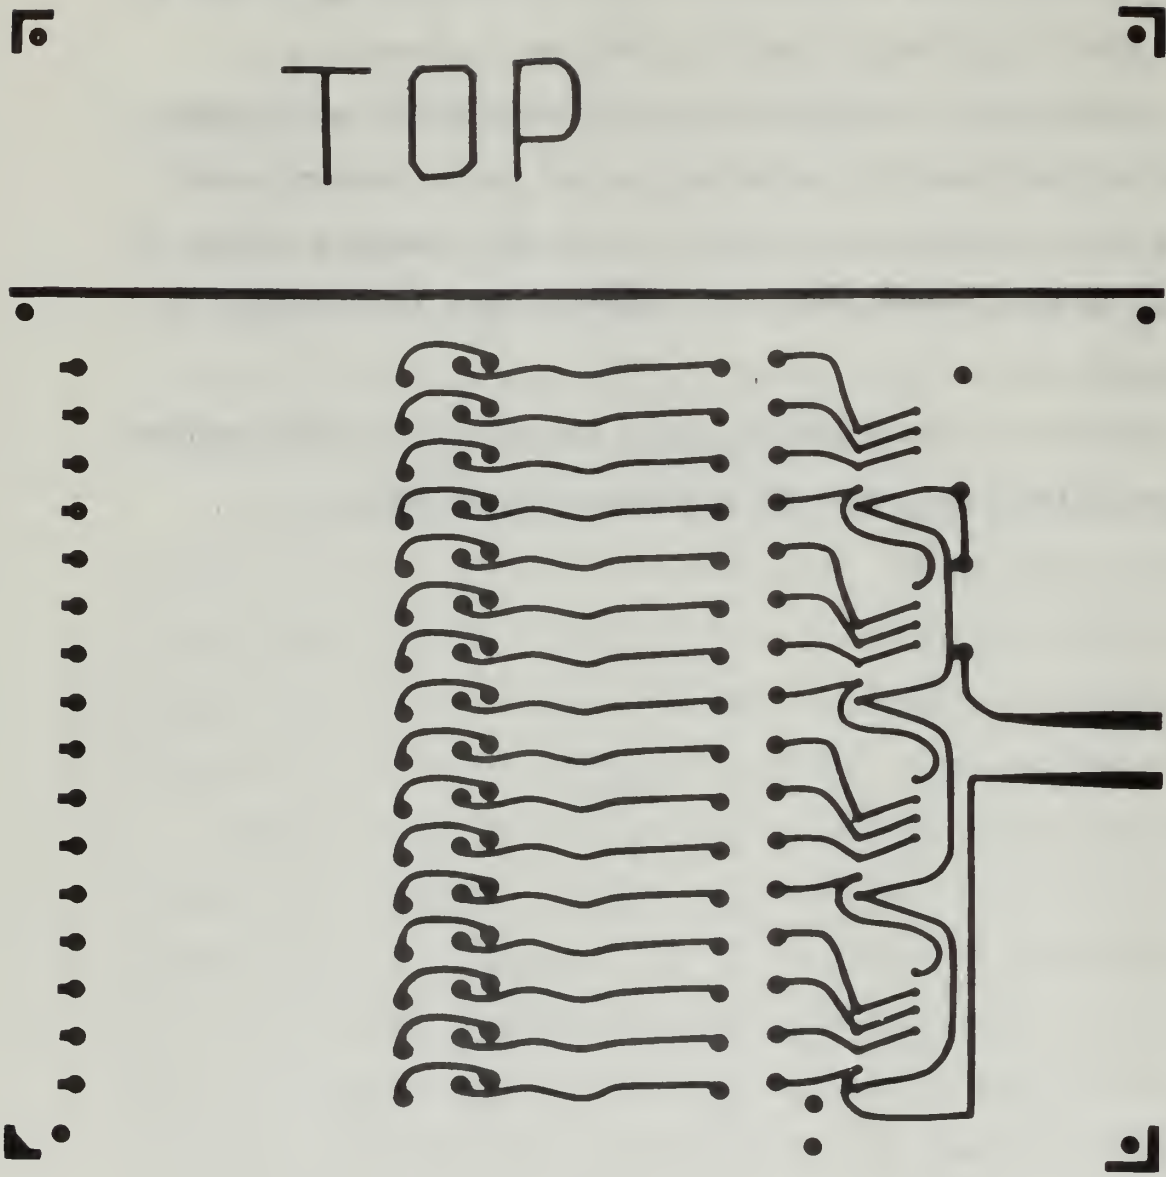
Printed Circuit Pattern for Top of PC Board (Actual Size)
